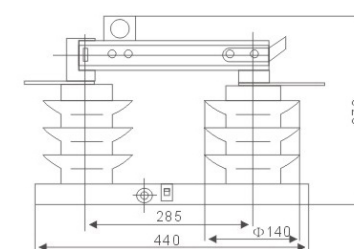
GW9-10(W)/⁴⁰⁰/₆₃₀ Overall Dimension
